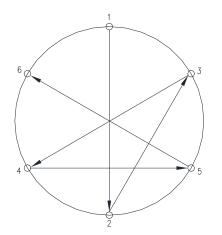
Tightening Pattern for Bolted Assemblies
